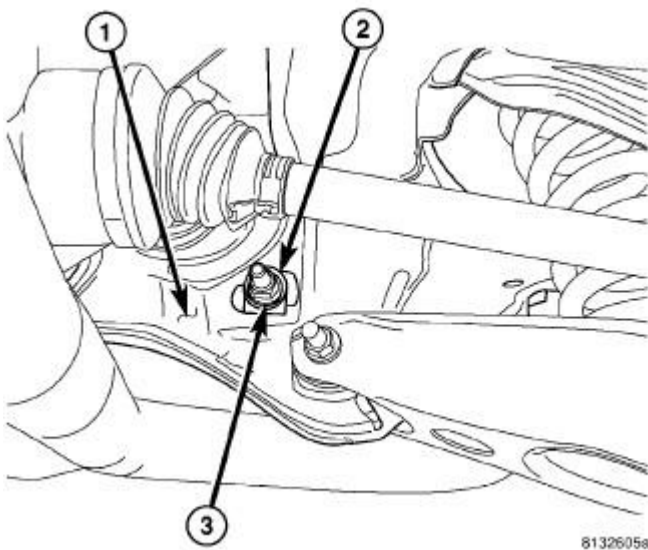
REAR TOE ADJUSTMENT BOLT NUT
